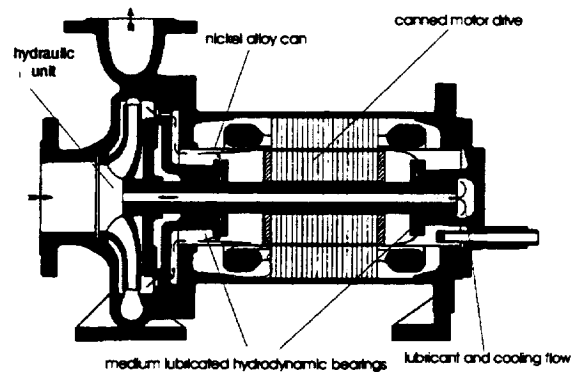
Cross section of a standard canned motor pump [Neum-94]
